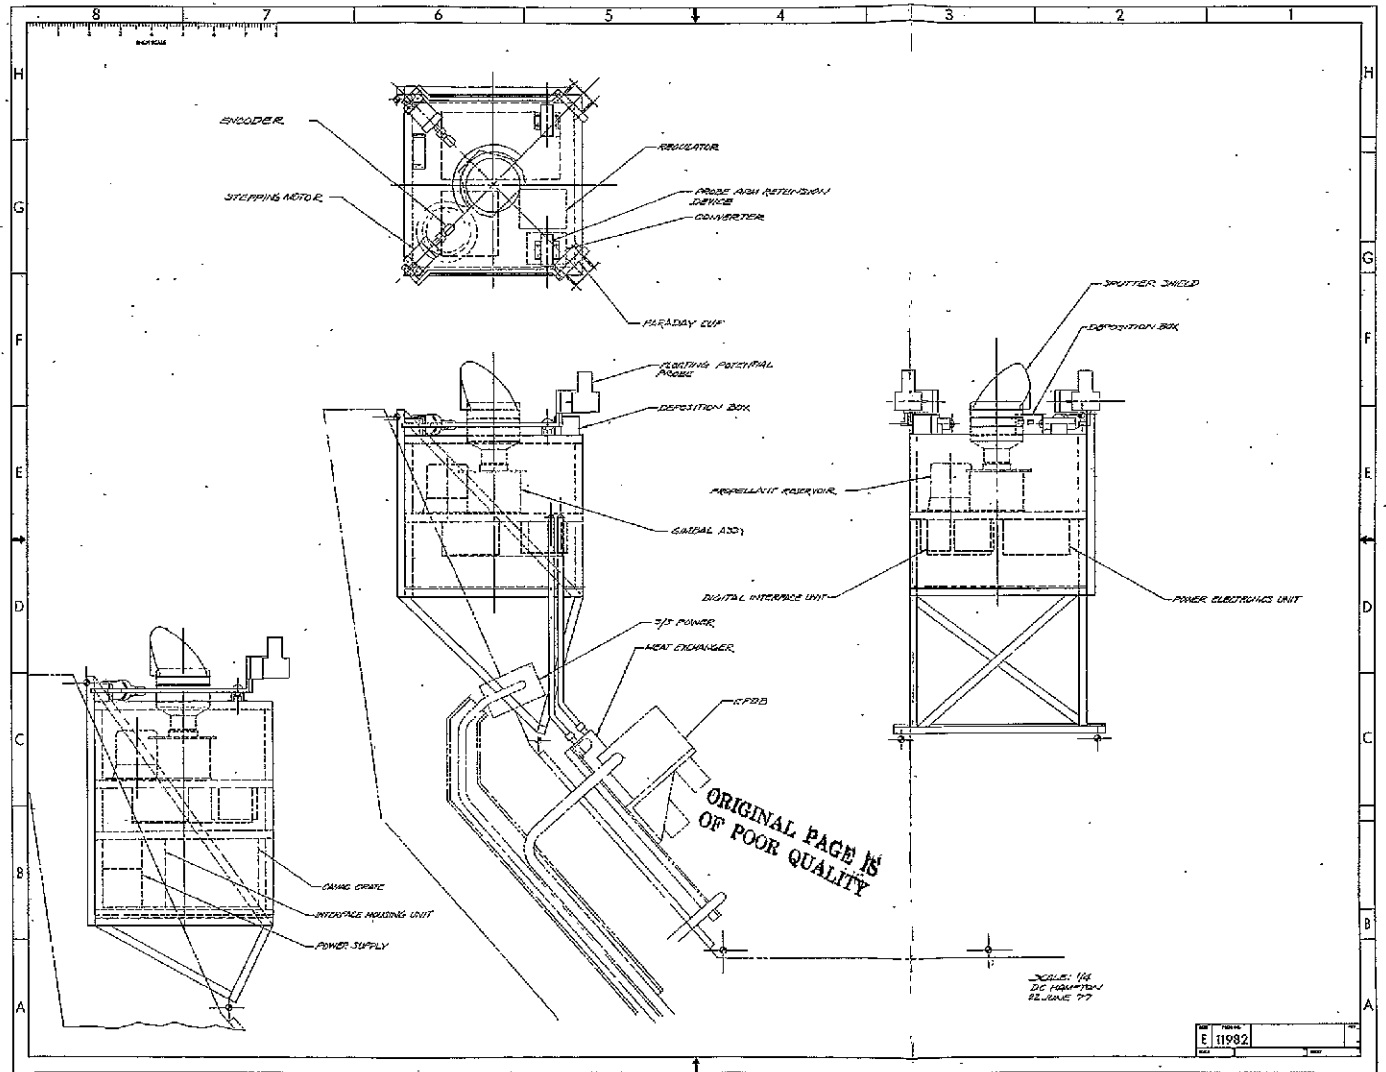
Ion Thruster Flight Experiment Package Mounted on SpaceLab Pallet (Edge-of-Bay Mounting).
